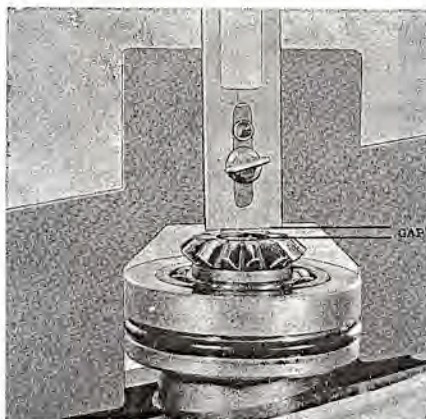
Using the recommended tools to adjust transmission end play. Refer to text for details.
